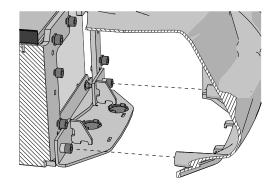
The lower screws of the chassis have to match the holes in the extrudes of the front cover.
